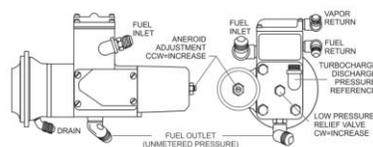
Aneroide Equipped Fuel Pump, Turbocharged Engine
